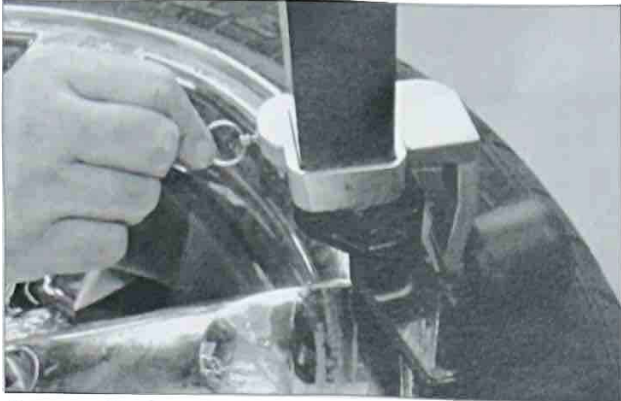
Pull Ring/Pin To Engage Duckhead Roller
